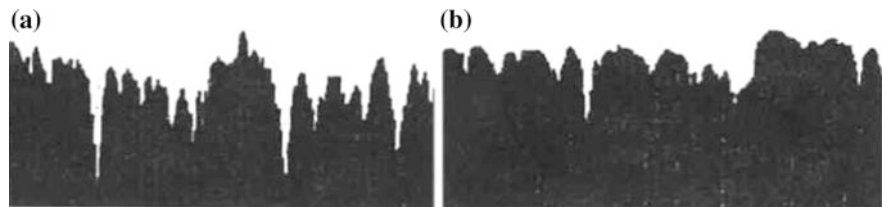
Comparison photographs of surface texture of cylinder liner. a Before finishing; b after finishing
